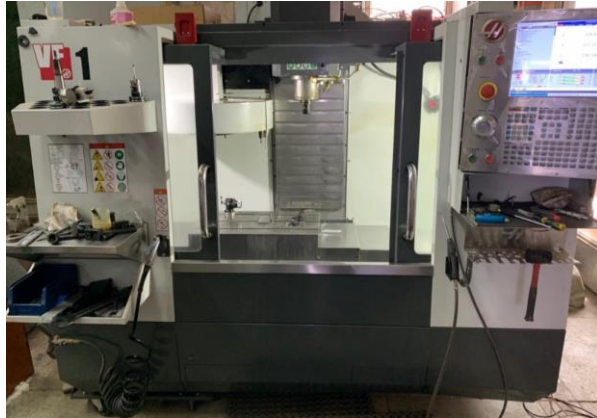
Vertical milling CNC machining center of the VF1 model Haas
